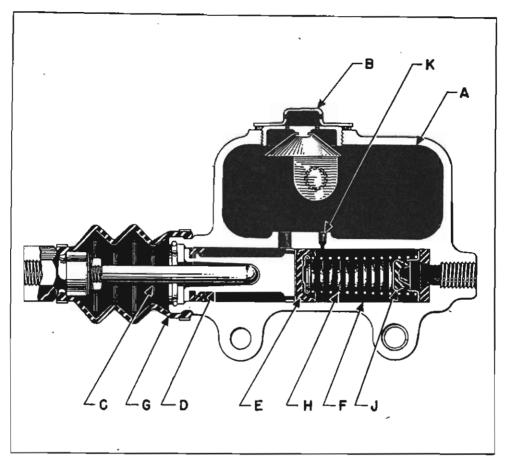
Cutaway of Brake Master Cylinder Showing Position of Working Parts with Brakes Released.
